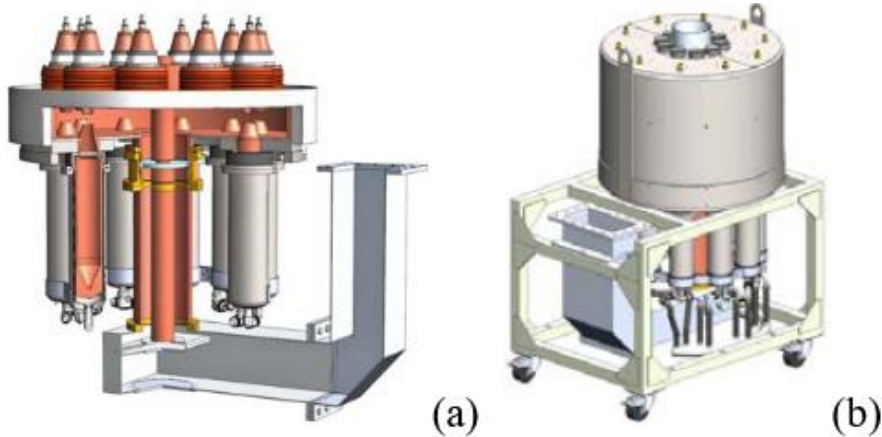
L3 MB-IOT: (a) Section view showing the configuration of the guns, combining cavity and coaxial output cavity. (b) Main assembly.
